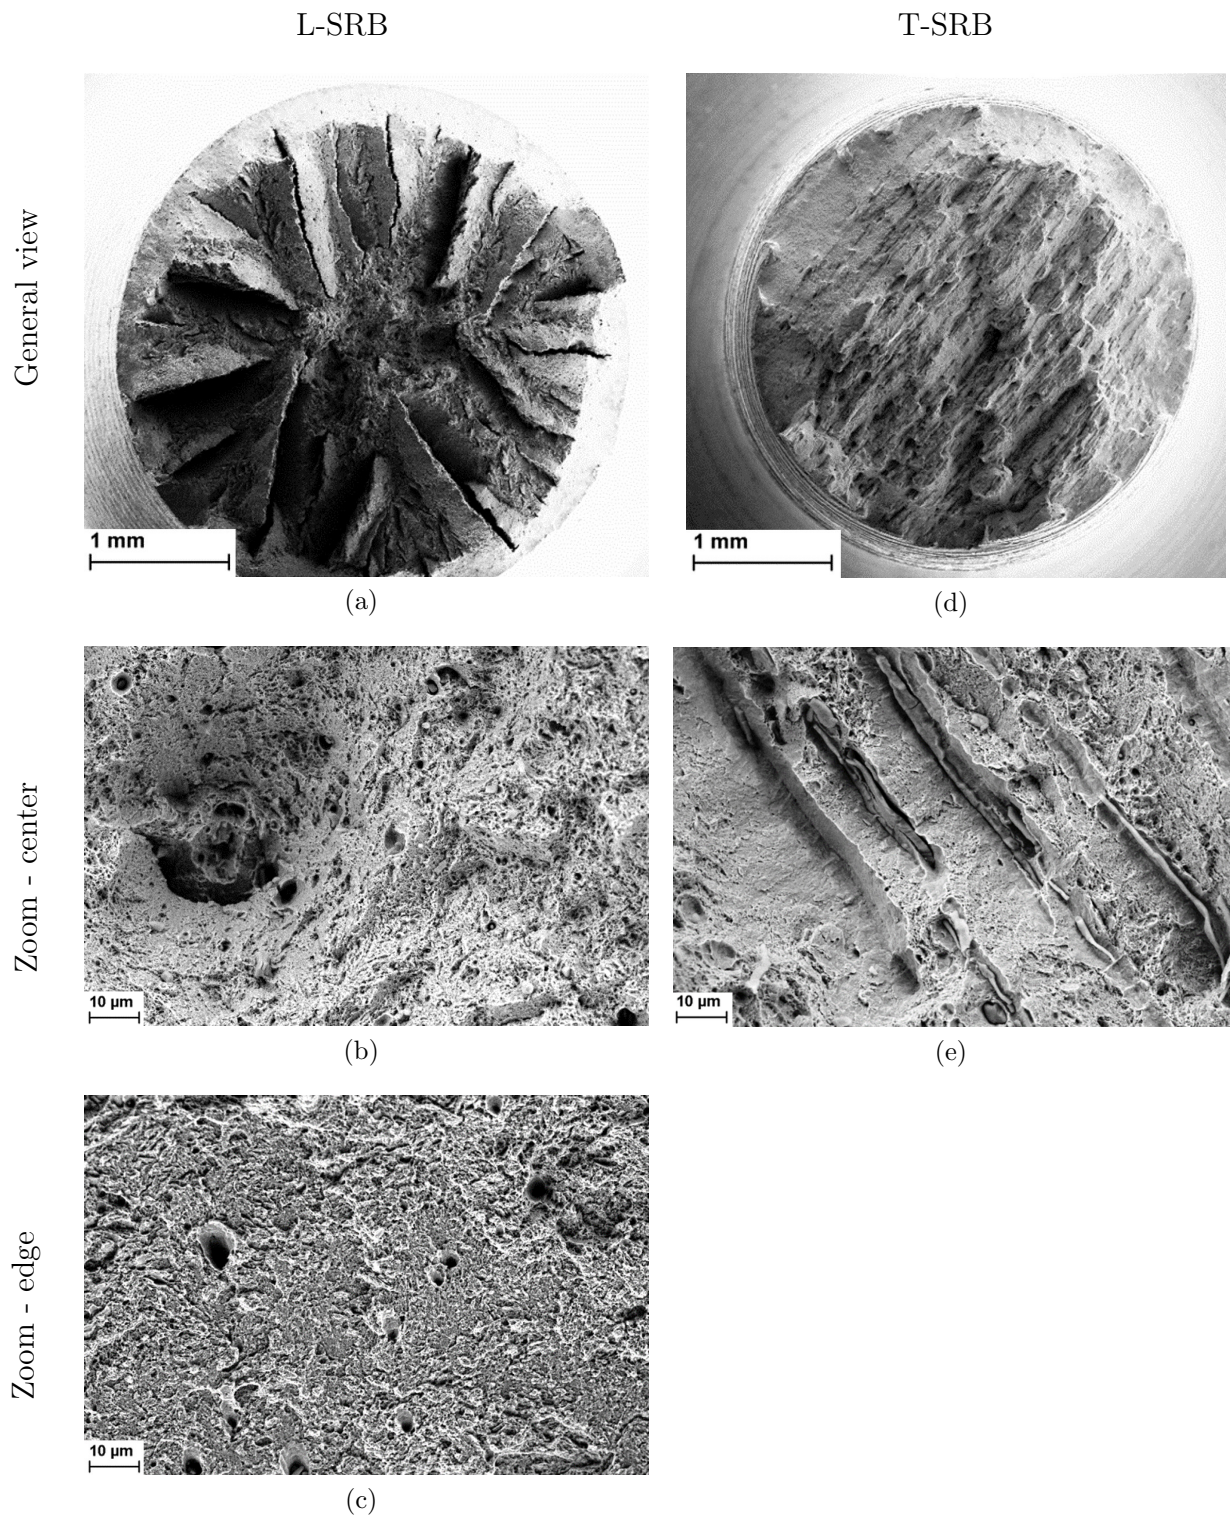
SRB specimens - micrographs of the fracture surface: (a - c) for a L-SRB specimen, and (d, e) for a T-SRB specimen.
